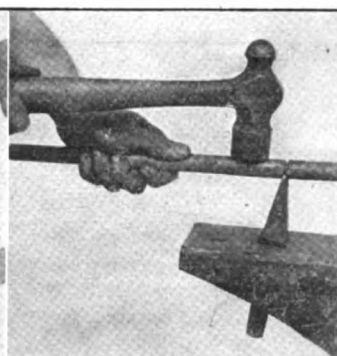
THE HARDY IS HERE BEING USED FOR COLD CUTTING
